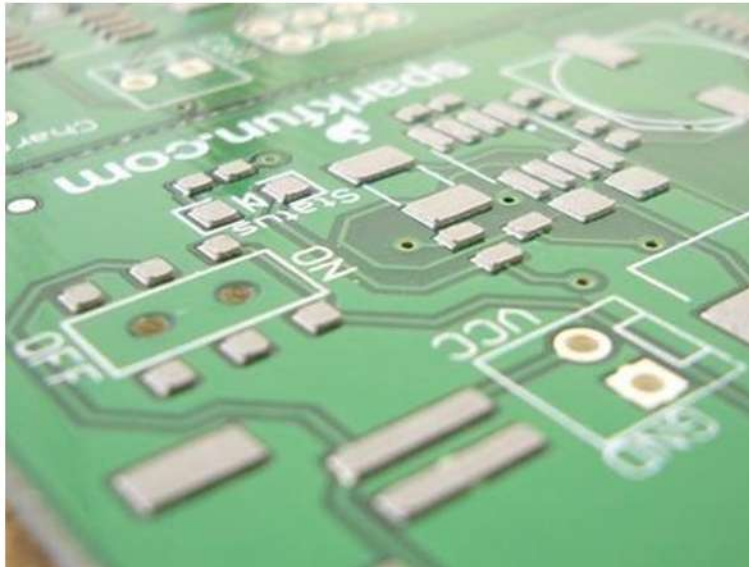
Solder paste on a PCB shortly before the components are placed. Be sure to read about paste stencil above as well.
